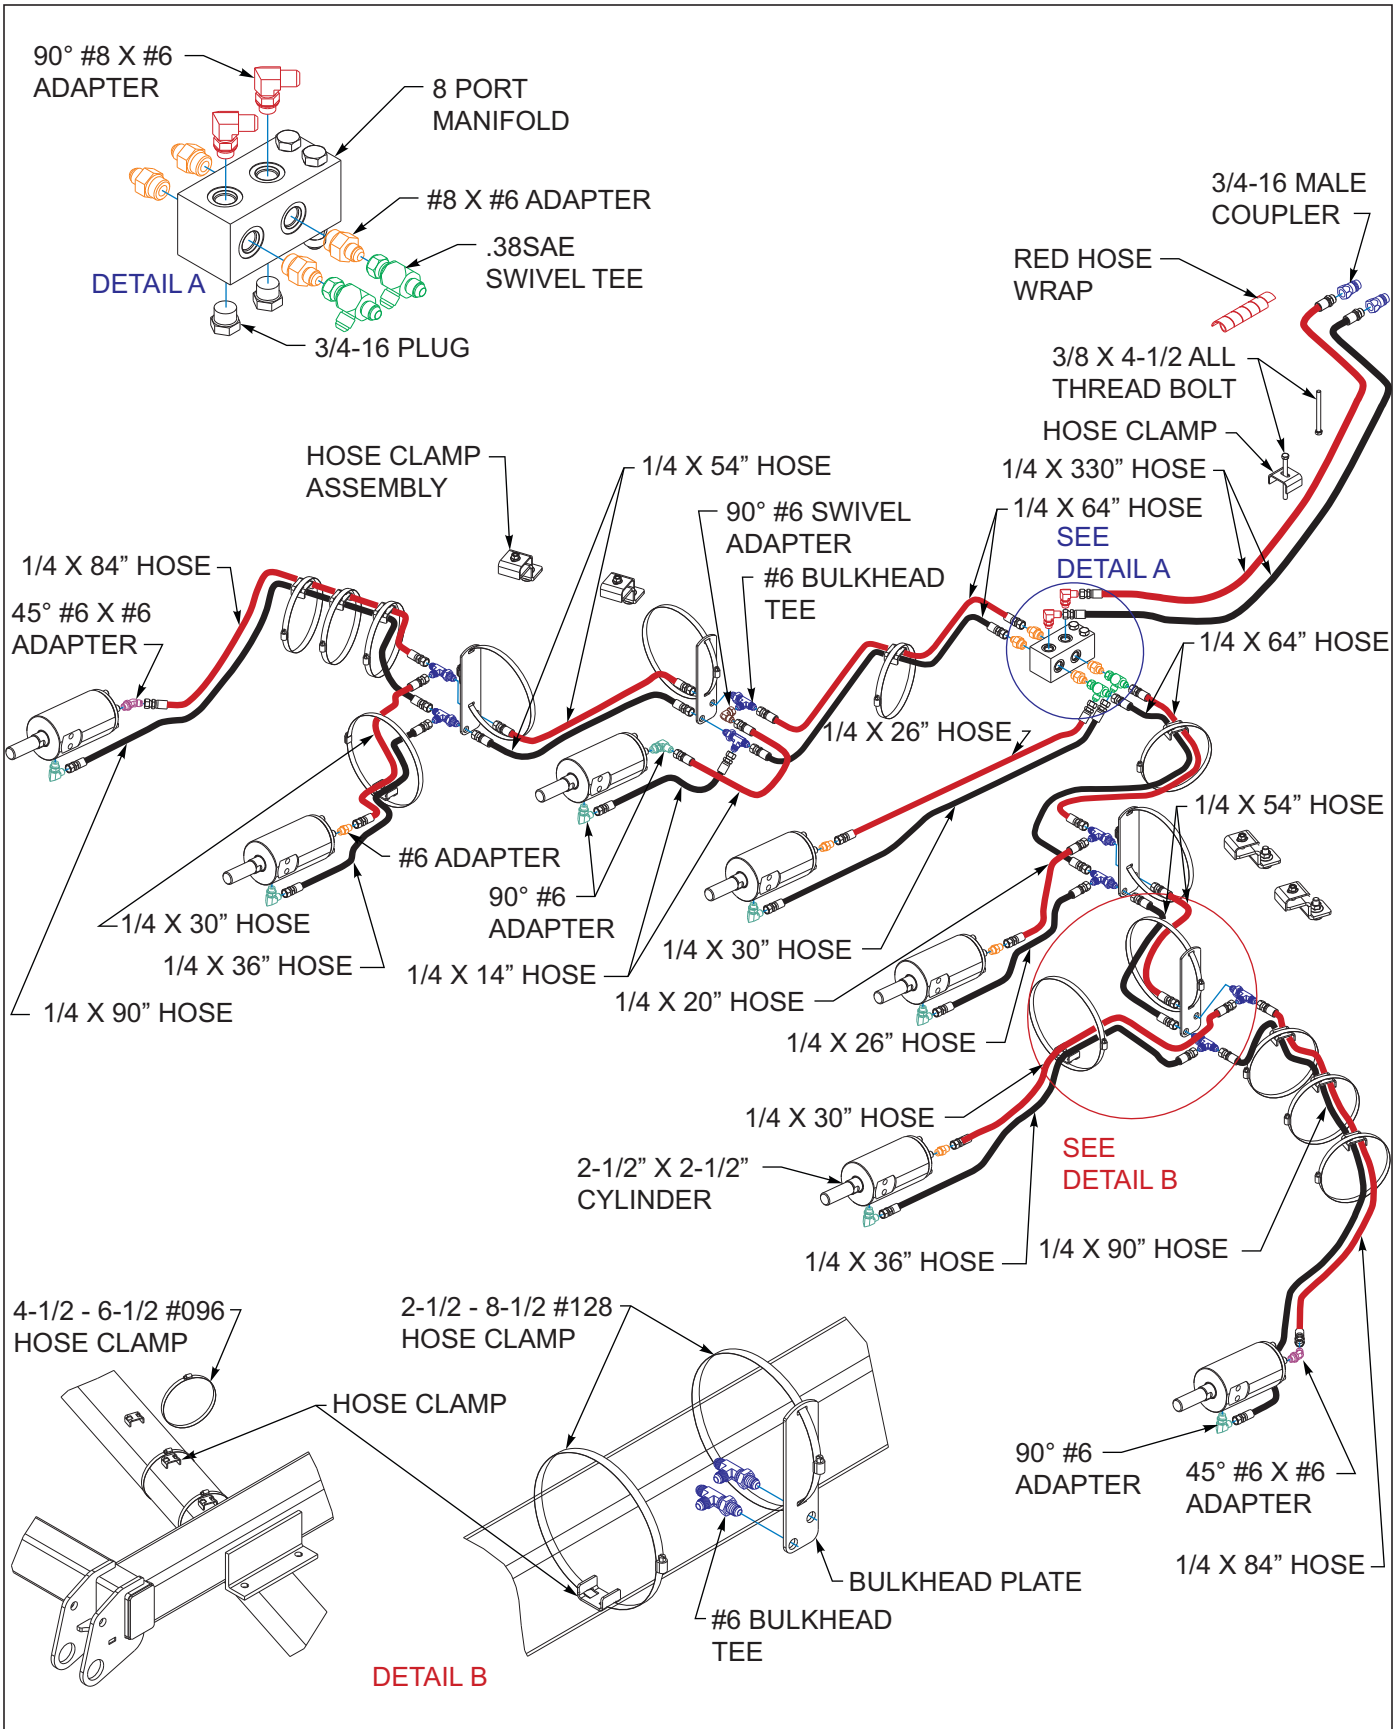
Hydraulic Double Reel Assembly 6231-21', 26', 29'
